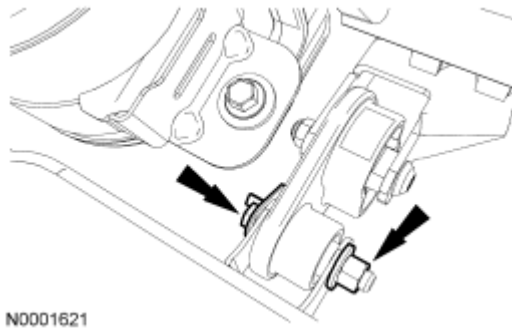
Locating Front Transaxle Stabilizer Bolt & Nut
